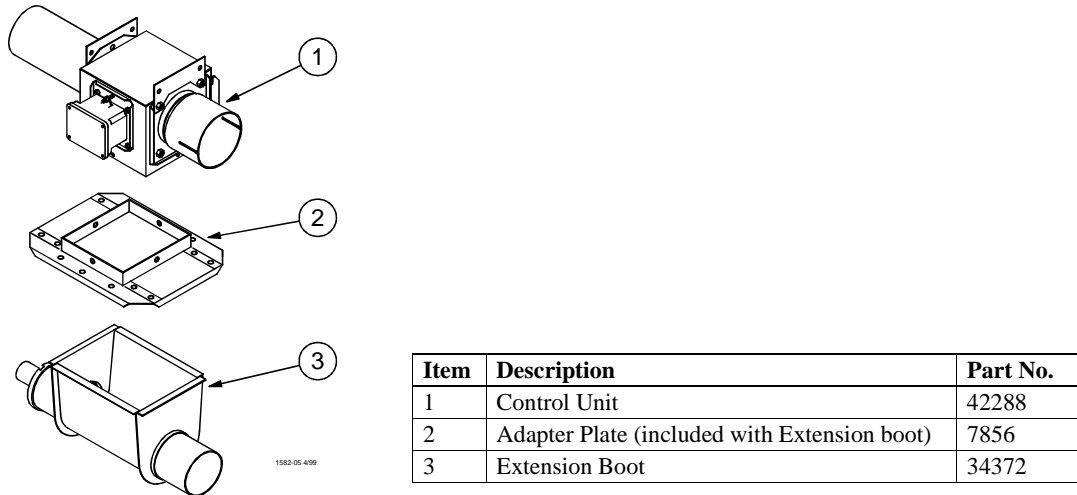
Assembling Extension Boot, Adapter Plate, and Control Unit (inline assembly shown)
